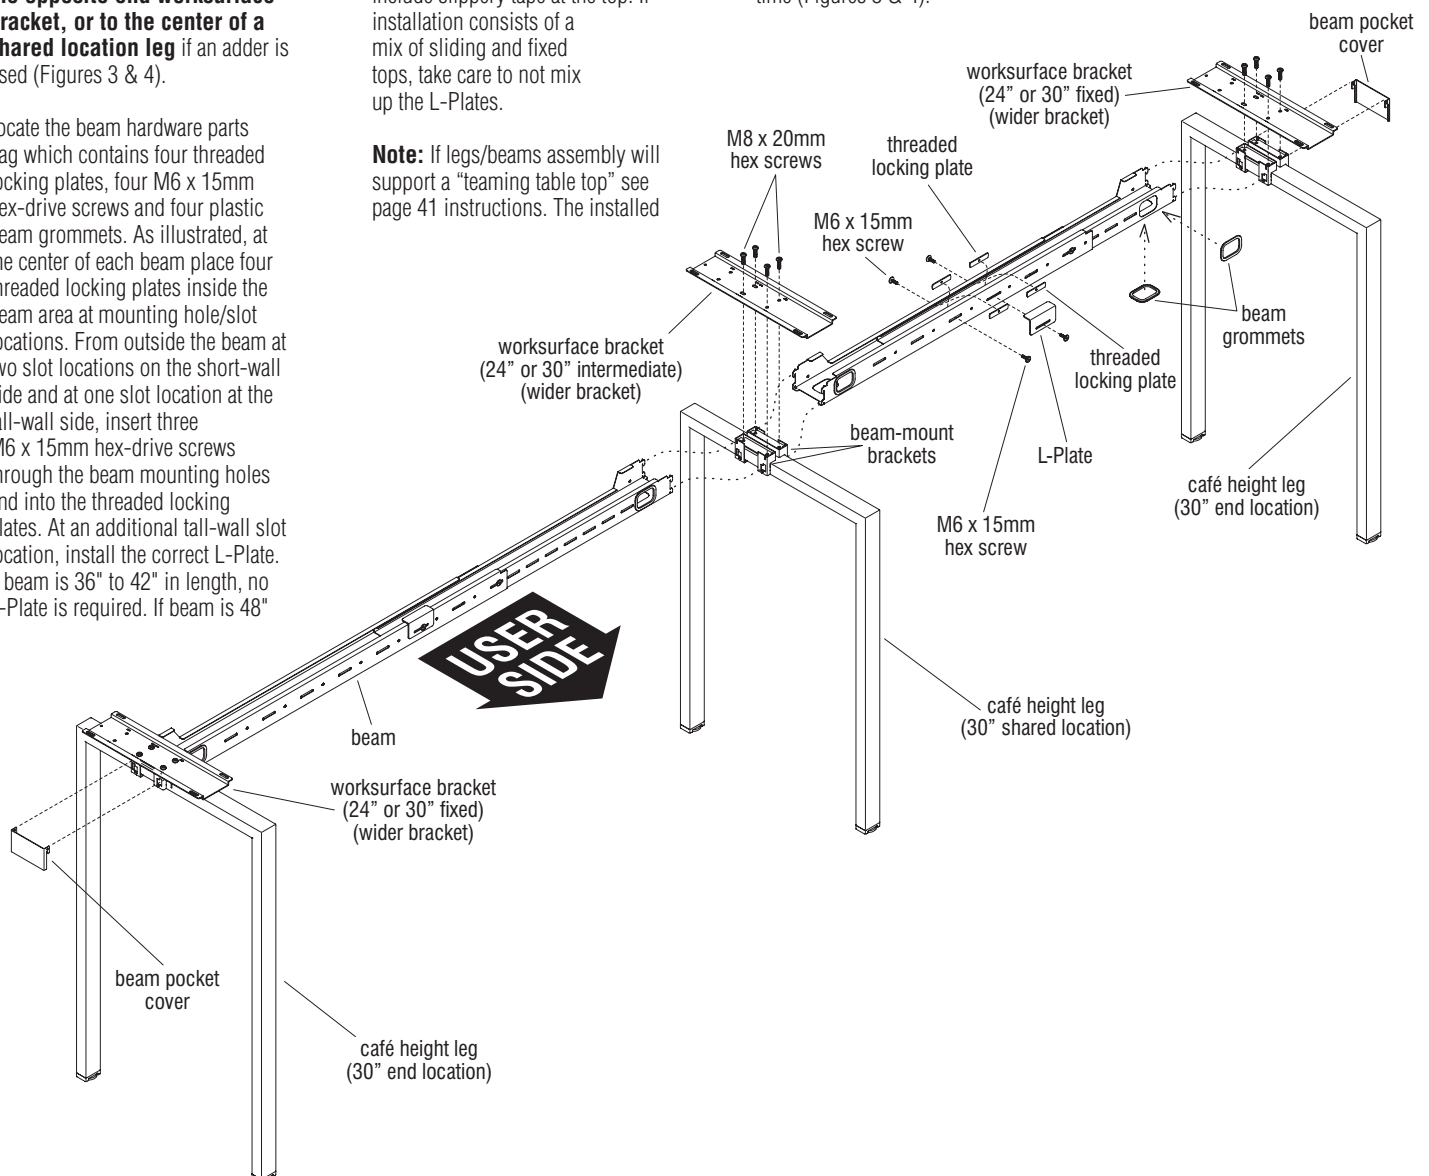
Single-Sided Fixed Café Height Benching, Multiple Worksurface (Adder) Legs & Beams
